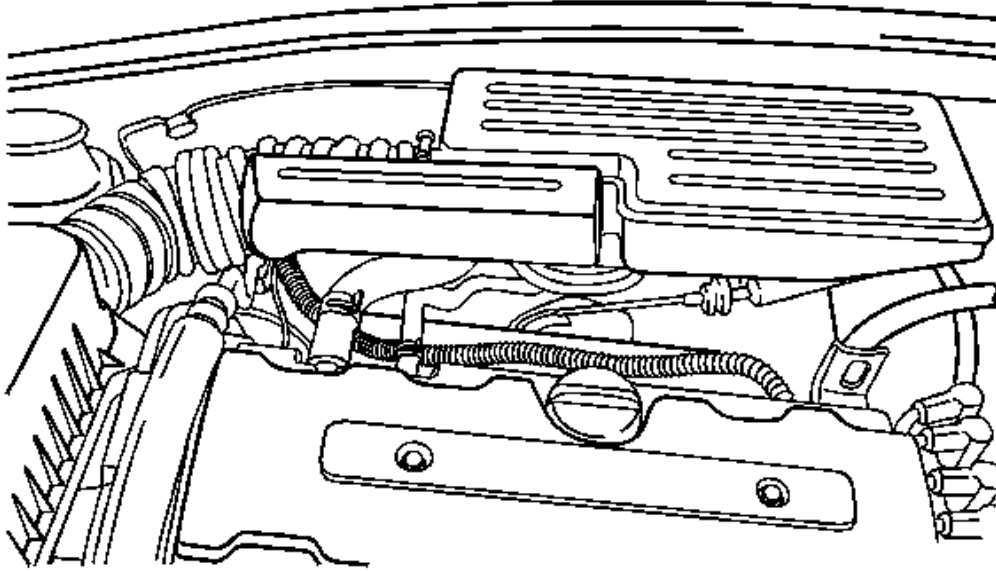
Locating Intake Air Temperature Sensor (Inside Air Intake Tube)
